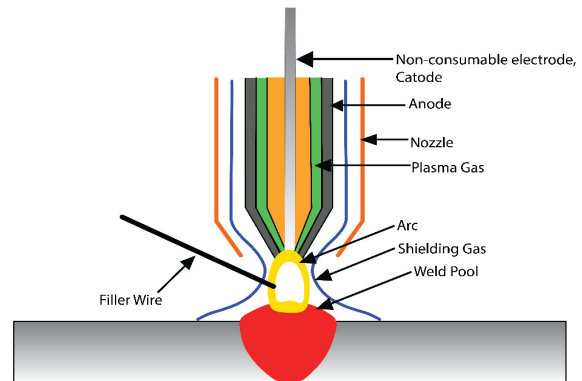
Scheme of the arc method of additive manufacturing – PAW
